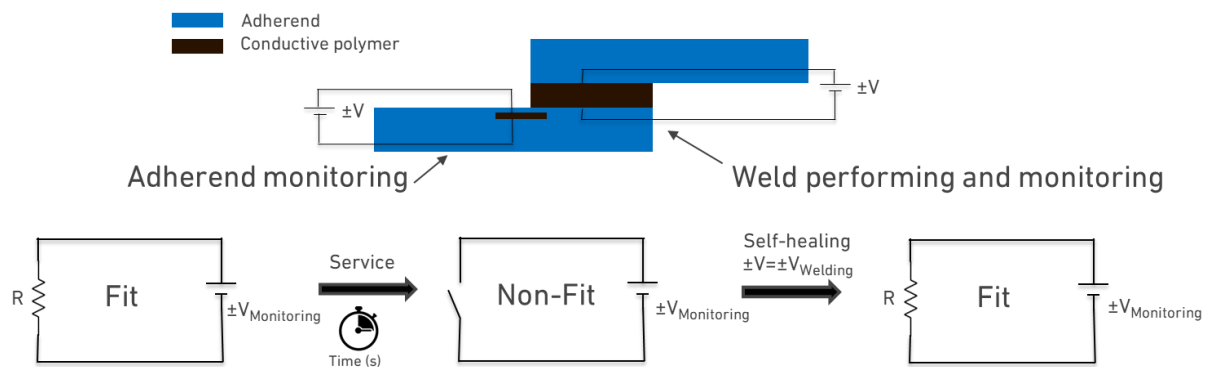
Concept of welding and self-healing using AM conductive material and embedded circuits.
